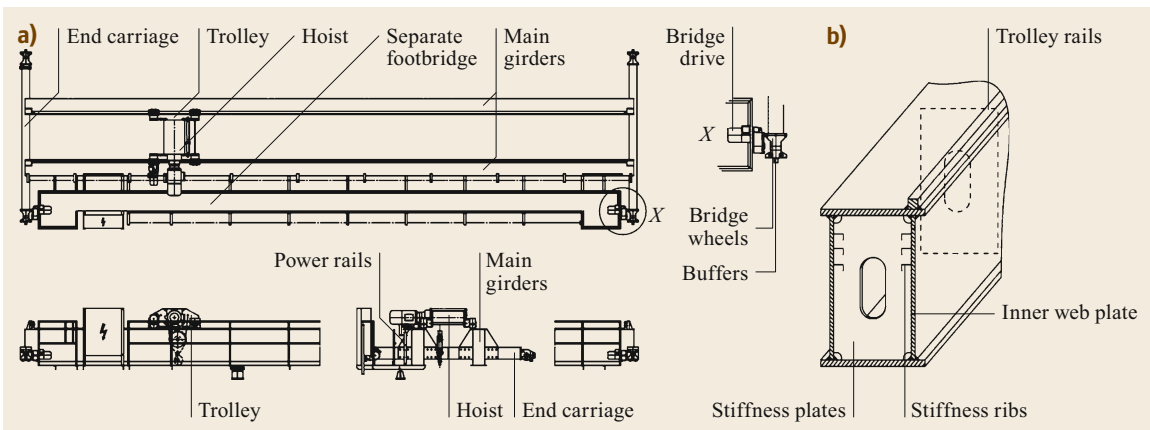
(a) Double-girder overhead crane with two parallel box girders (KULI Hebezeuge), (b) cross-section of the box girder with stiffening plates and ribs
